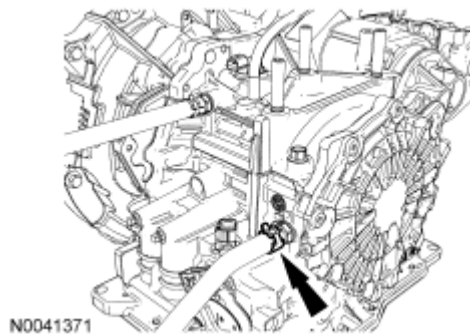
Locating Transmission Fluid Cooler Return Hose
